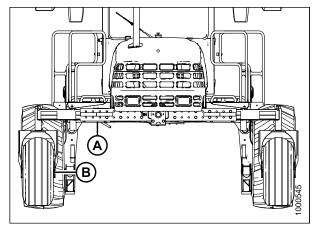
Caster Wheel Assembly and Walking Beam (Engine-Forward View)
